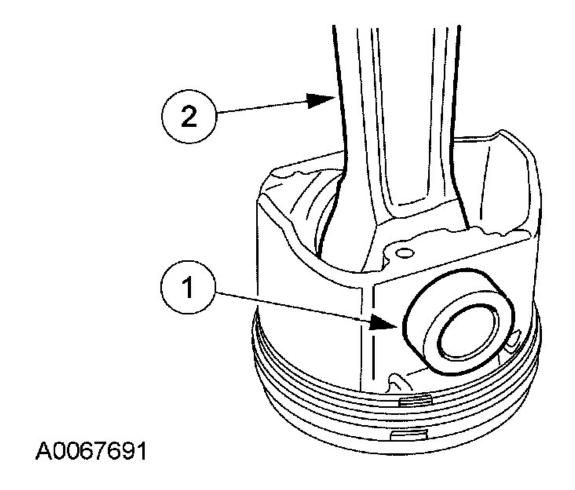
Removing Connecting Rod Courtesy of FORD MOTOR CO.
